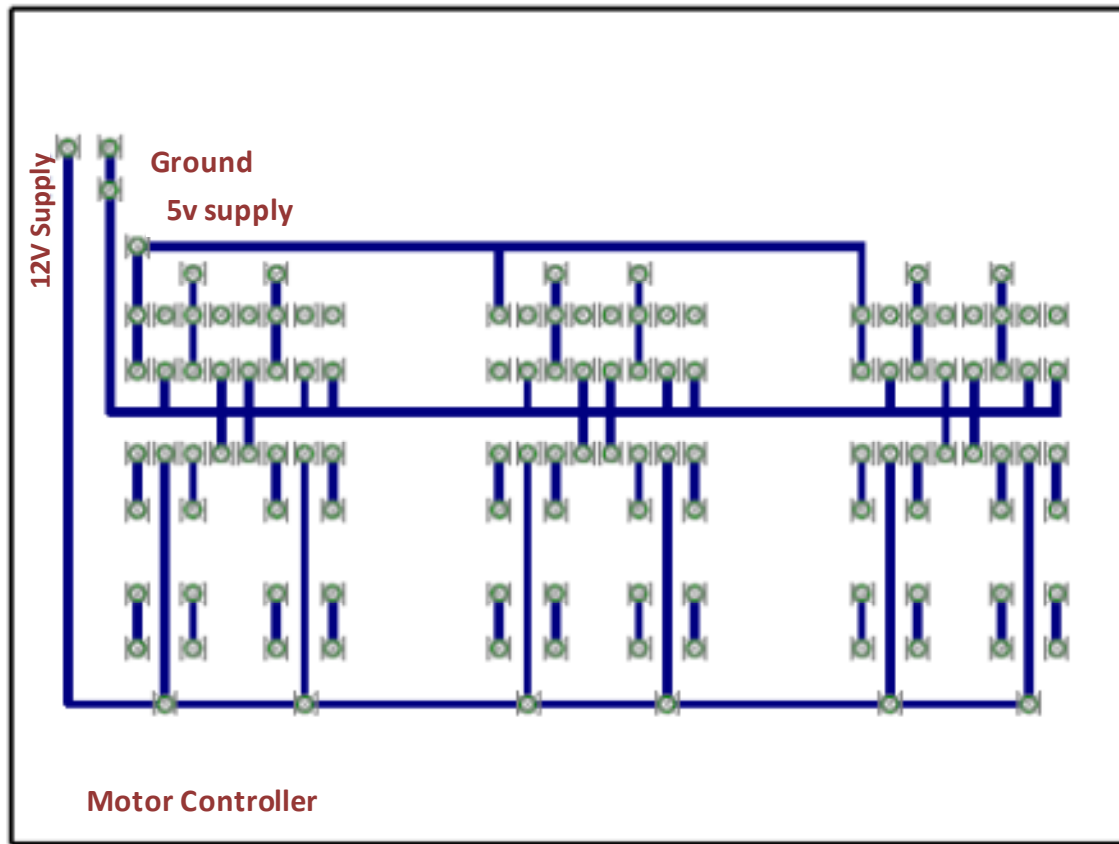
X-Y-Z Three Motor Control Printed Circuit Board Layout
